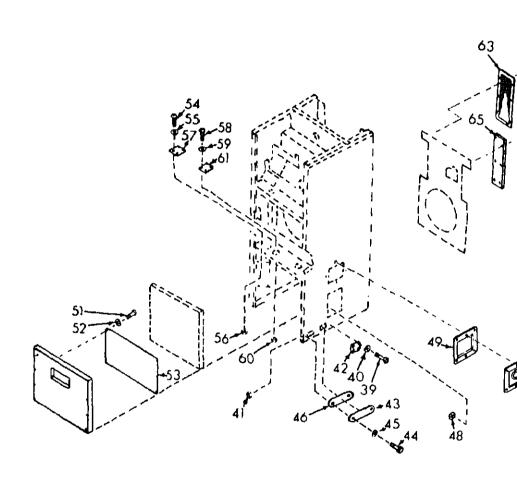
Casing, Panels, Grilles, Filter and Drag (Sheet 3 of 5)
